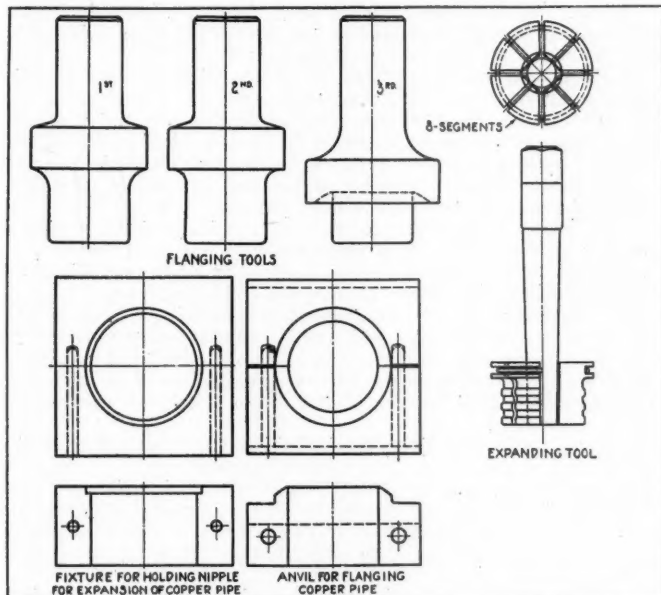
Hand Tools for Beading and Expanding Copper Pipe
